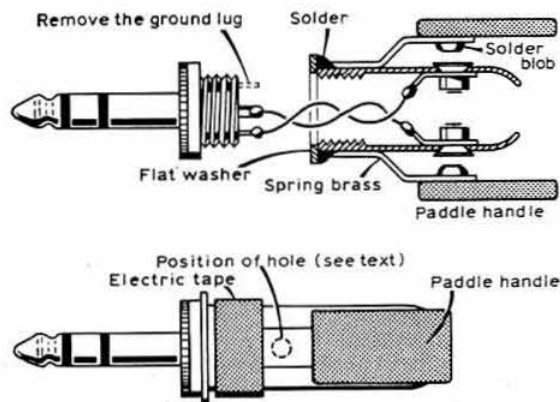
Details of ZS6AL's ambidextrous paddle for electronic keyers built using a standard three-conductor jack plug for use when the fixed station dual-lever paddle is inconvenient
